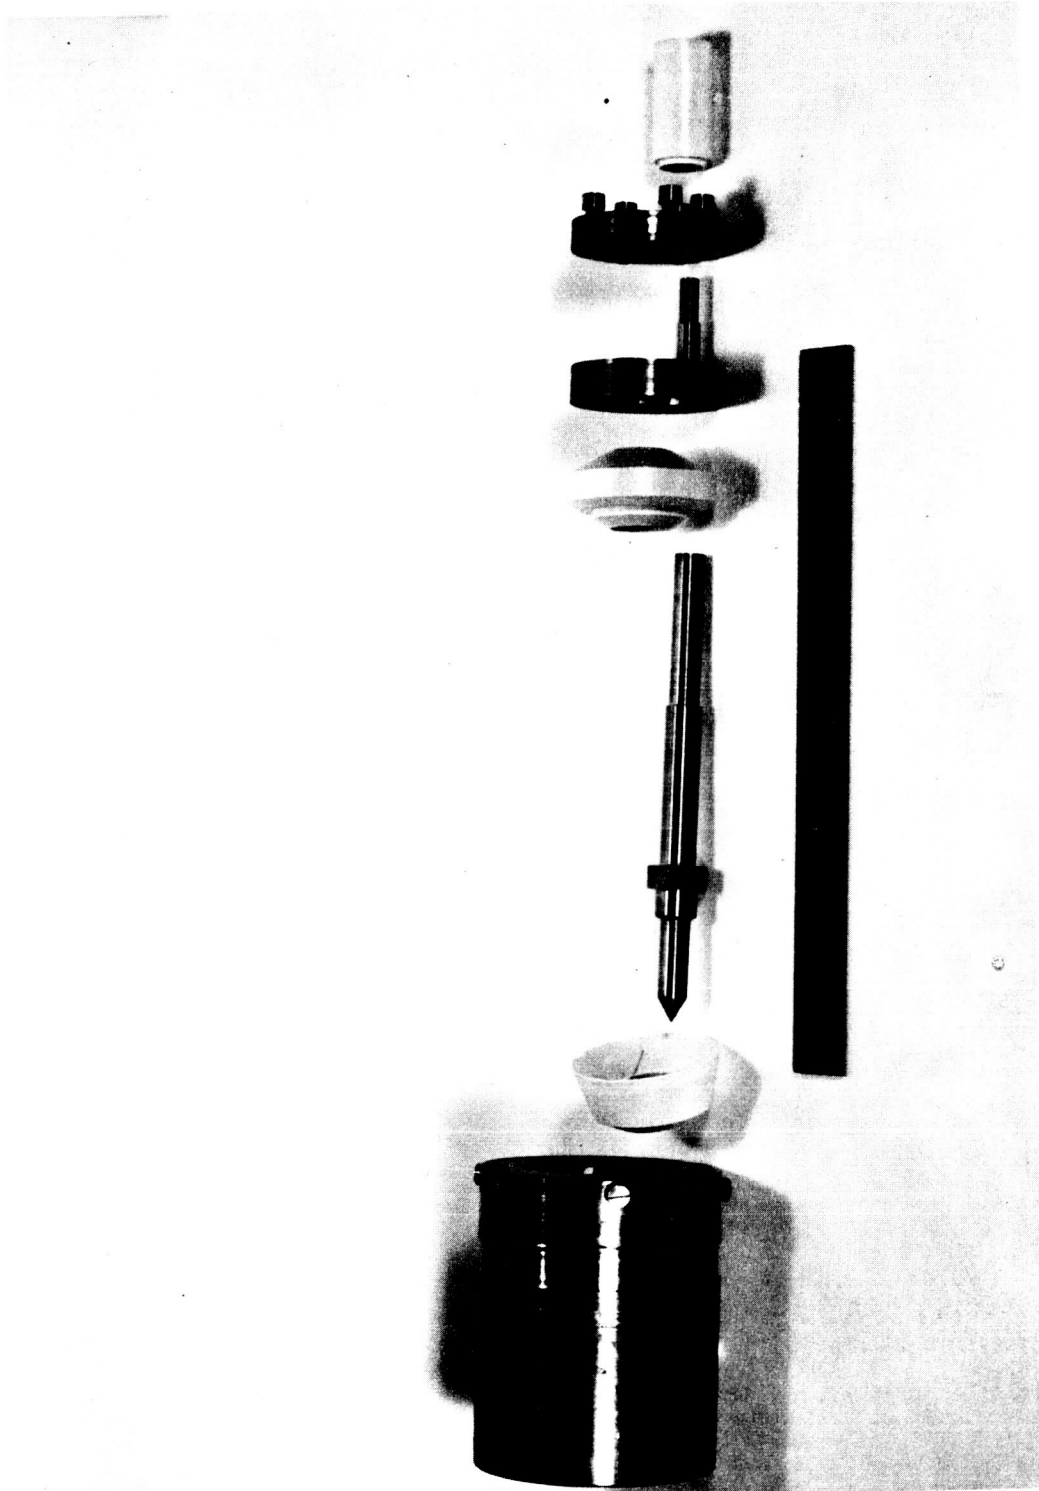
Photograph of X-7C-R MPD Thruster Disassembled
